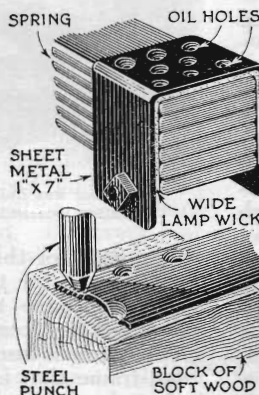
Ingenious spring oiler made from a strip of sheet iron and lamp wick
